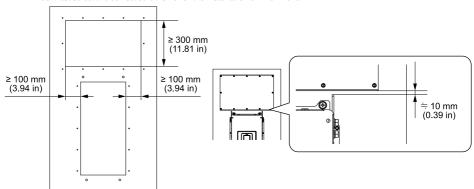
Opening Dimensions for Cooling Fan Replacement
